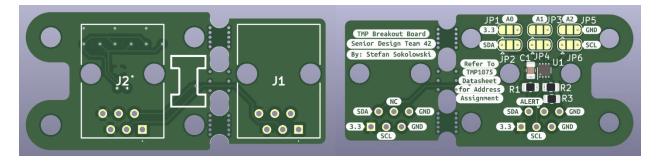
PCB Render of TMP1075 Breakout Board
